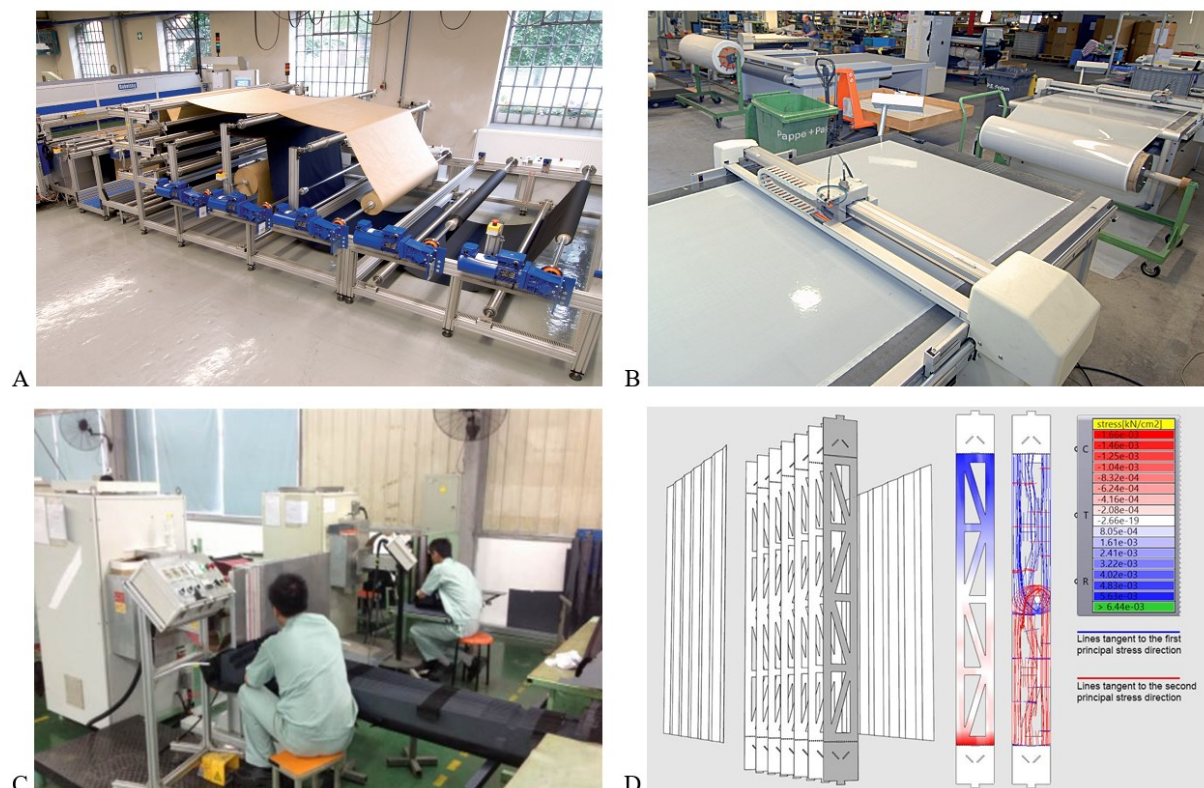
A. Pleating machine; B. Cutting centre; C. Welding process [Source: courtesy of MöllerWerke GmbH]; D. Principal stress map
